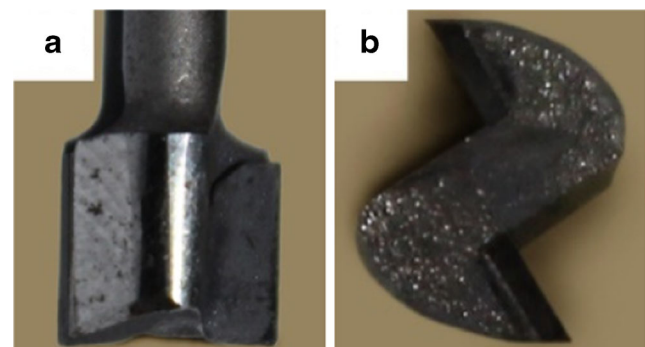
Images of tool. a Optical photography of micro-end mill. b Optical photography of cutting edge
